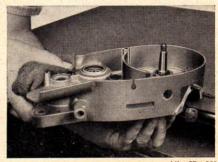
Removing crankshaft from the heated left hand crankcase half-member
